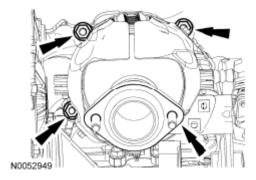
Locating Fuel Rail Bolts Courtesy of FORD MOTOR CO.
